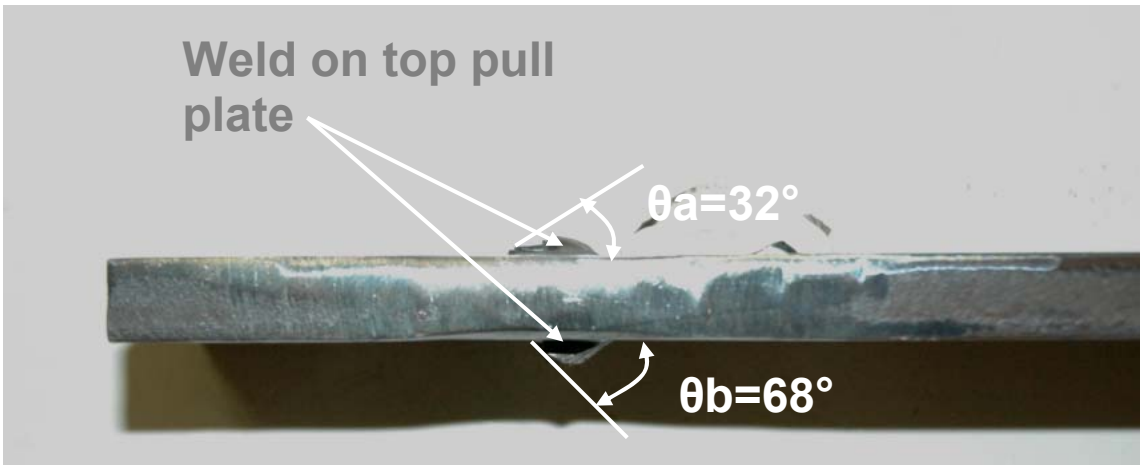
Photograph of a side view Specimen 3, where the profile of the fractured weld on the top pull plate is visible
